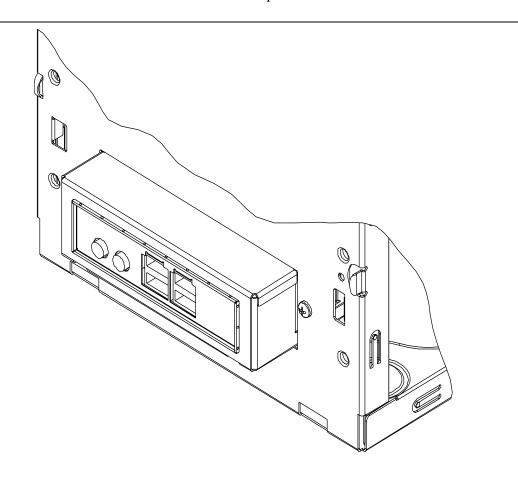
Front Panel I/O Housing and Shield Assembly Reference Design
